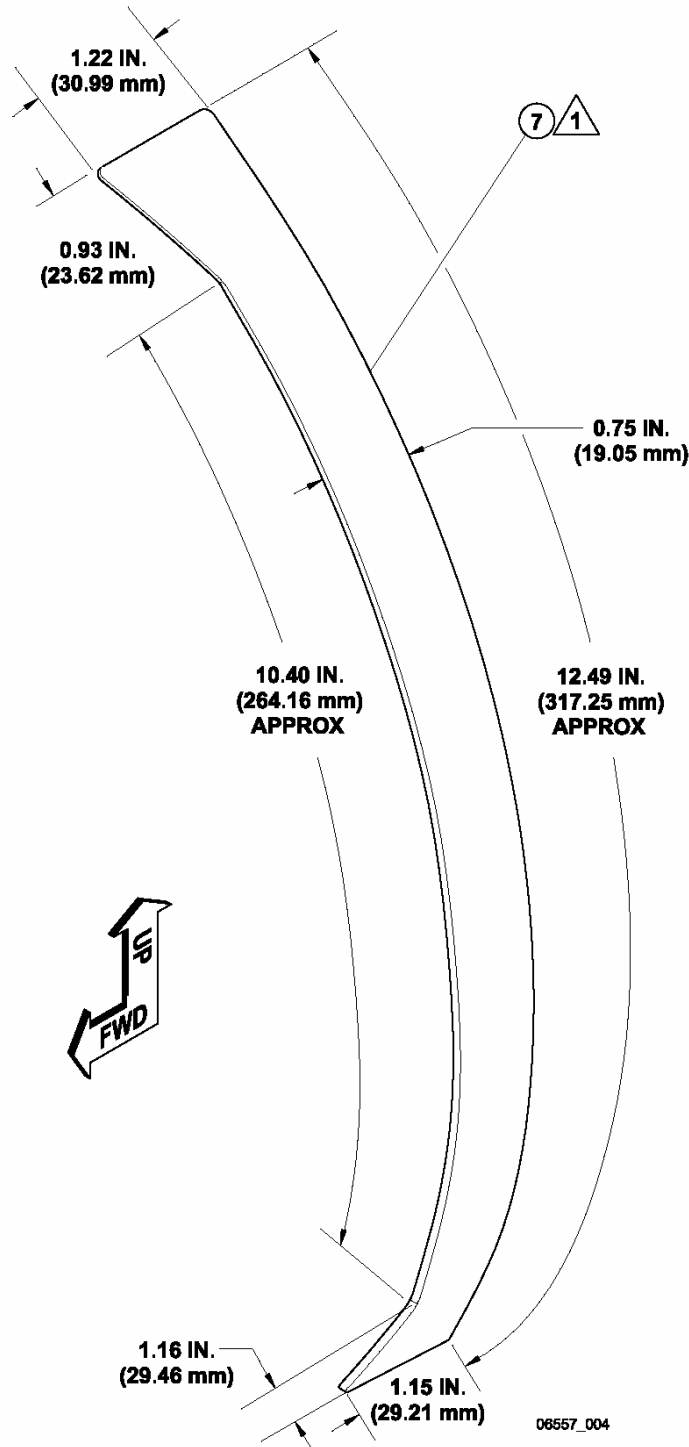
Installation of aft fuselage bulkhead (sheet 3 of 4)
